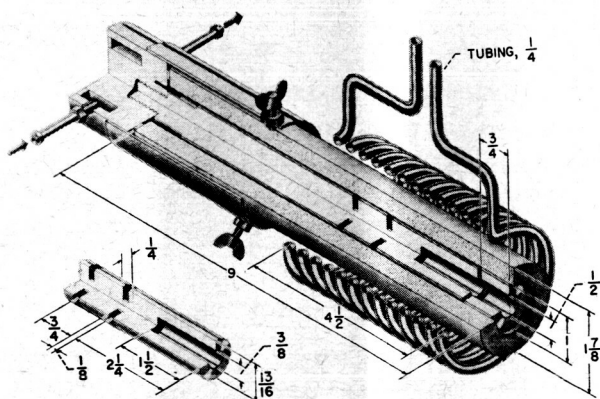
Dimensional detail of furnace (all dimensions are in inches).
